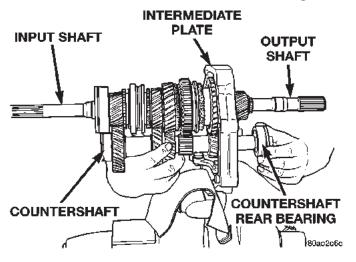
Remove Countershaft and Countershaft Rear Bearing
